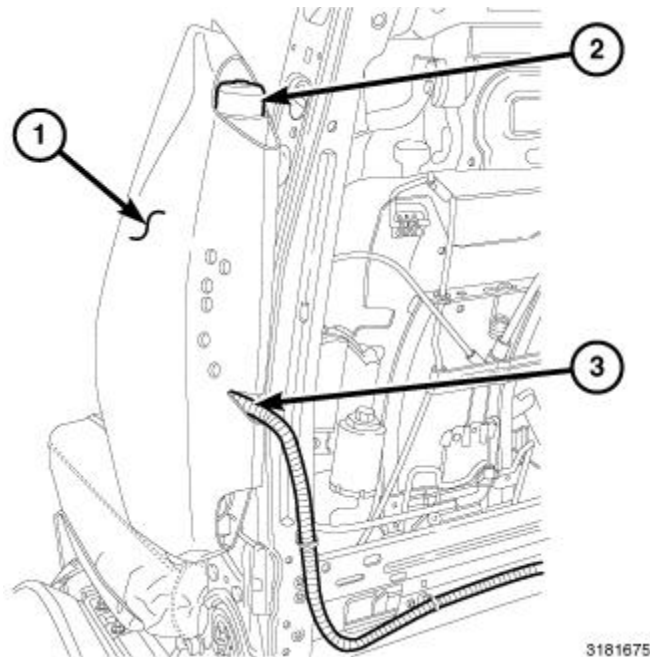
Chute, SAB Jumper Wire Harness & SAB Inflator
